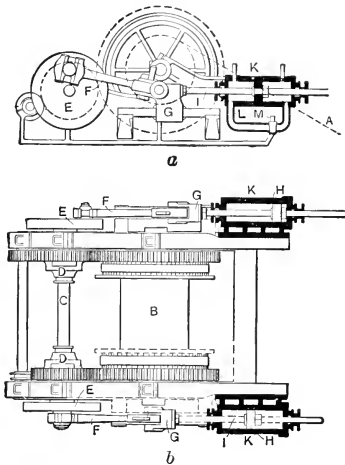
A Hydraulic Snubbing Machine. *a*, side view. *b*, top view.
